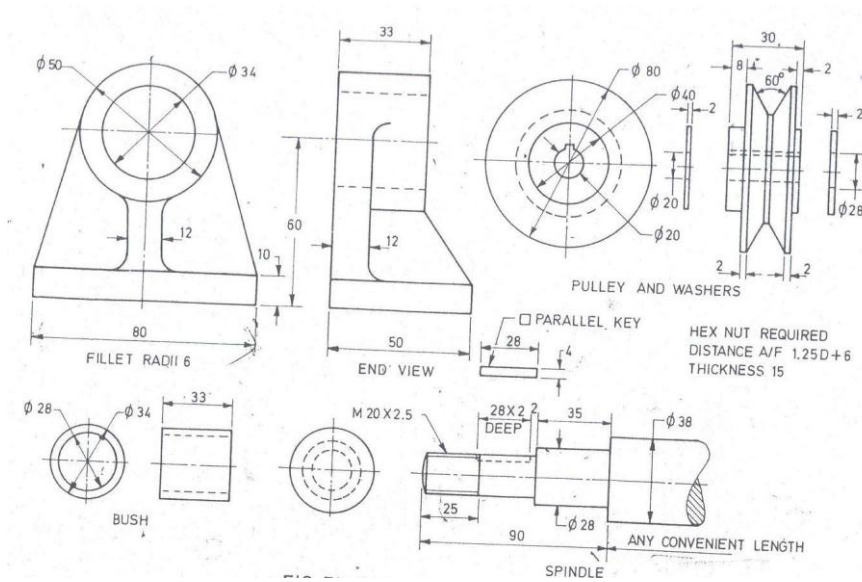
shows parts of PULLEY BLOCK assembly. Assemble the parts and draw FULL SIZE in First angle orthographic projection, the following views;
